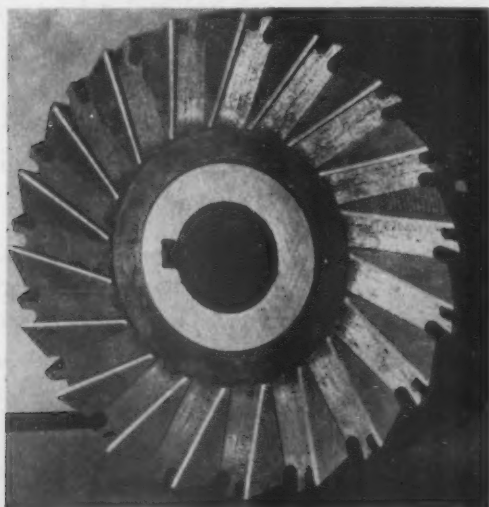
THE FINISHED MILLING CUTTER FROM CASTING SHOWN IN FIG. 47.
